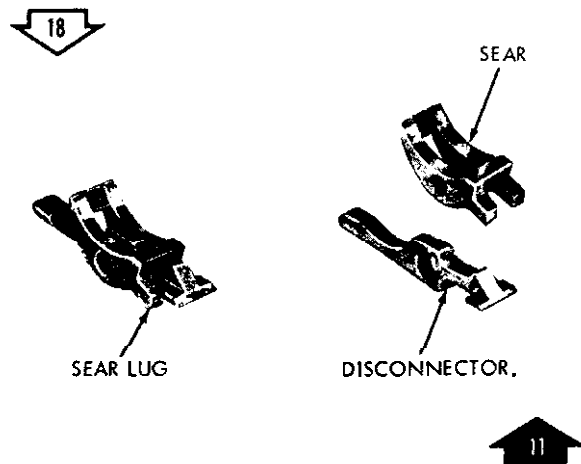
Disassembly/assembly of receiver group (1/2 of 1).
